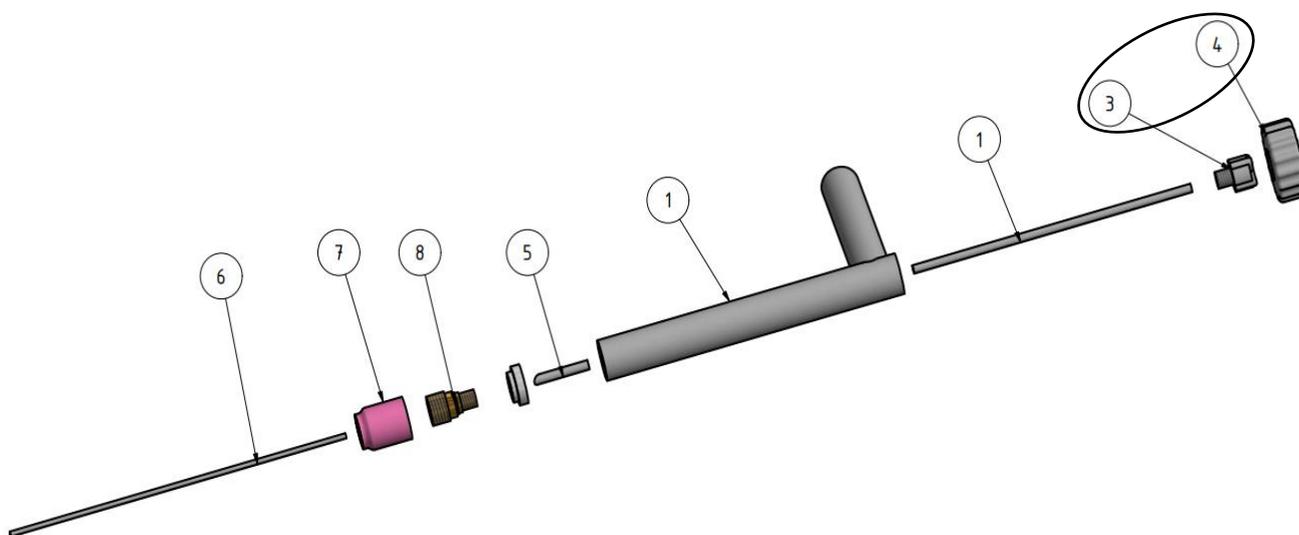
Exploded view diagram of machine torch with ceramic nozzle
